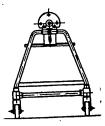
Stand for Assembly of Nozzle Intake Ducts and Nozzle.
